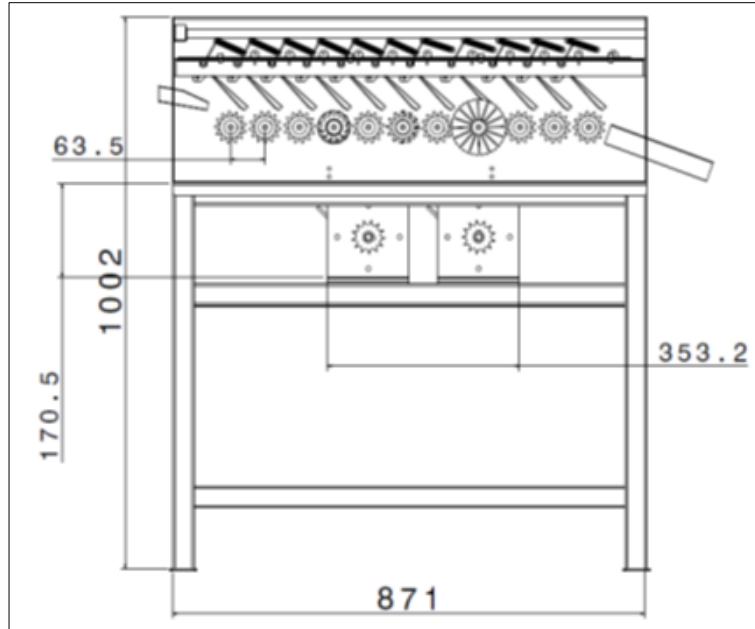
Elevation of the fish descaling machine, (All dimensions are in mm)
